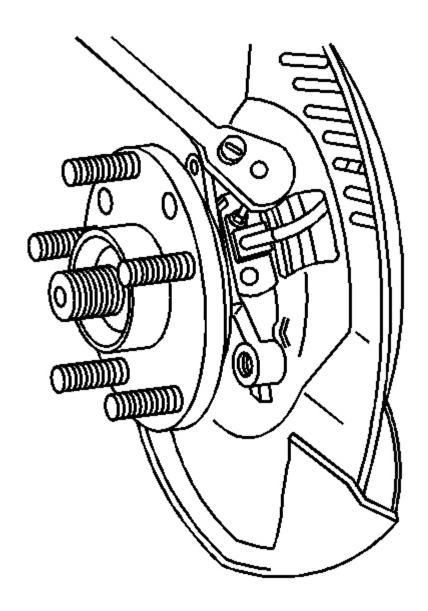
Removing/Installing Wheel Speed Sensor Mounting Bolt Courtesy of GENERAL MOTORS CORP.
